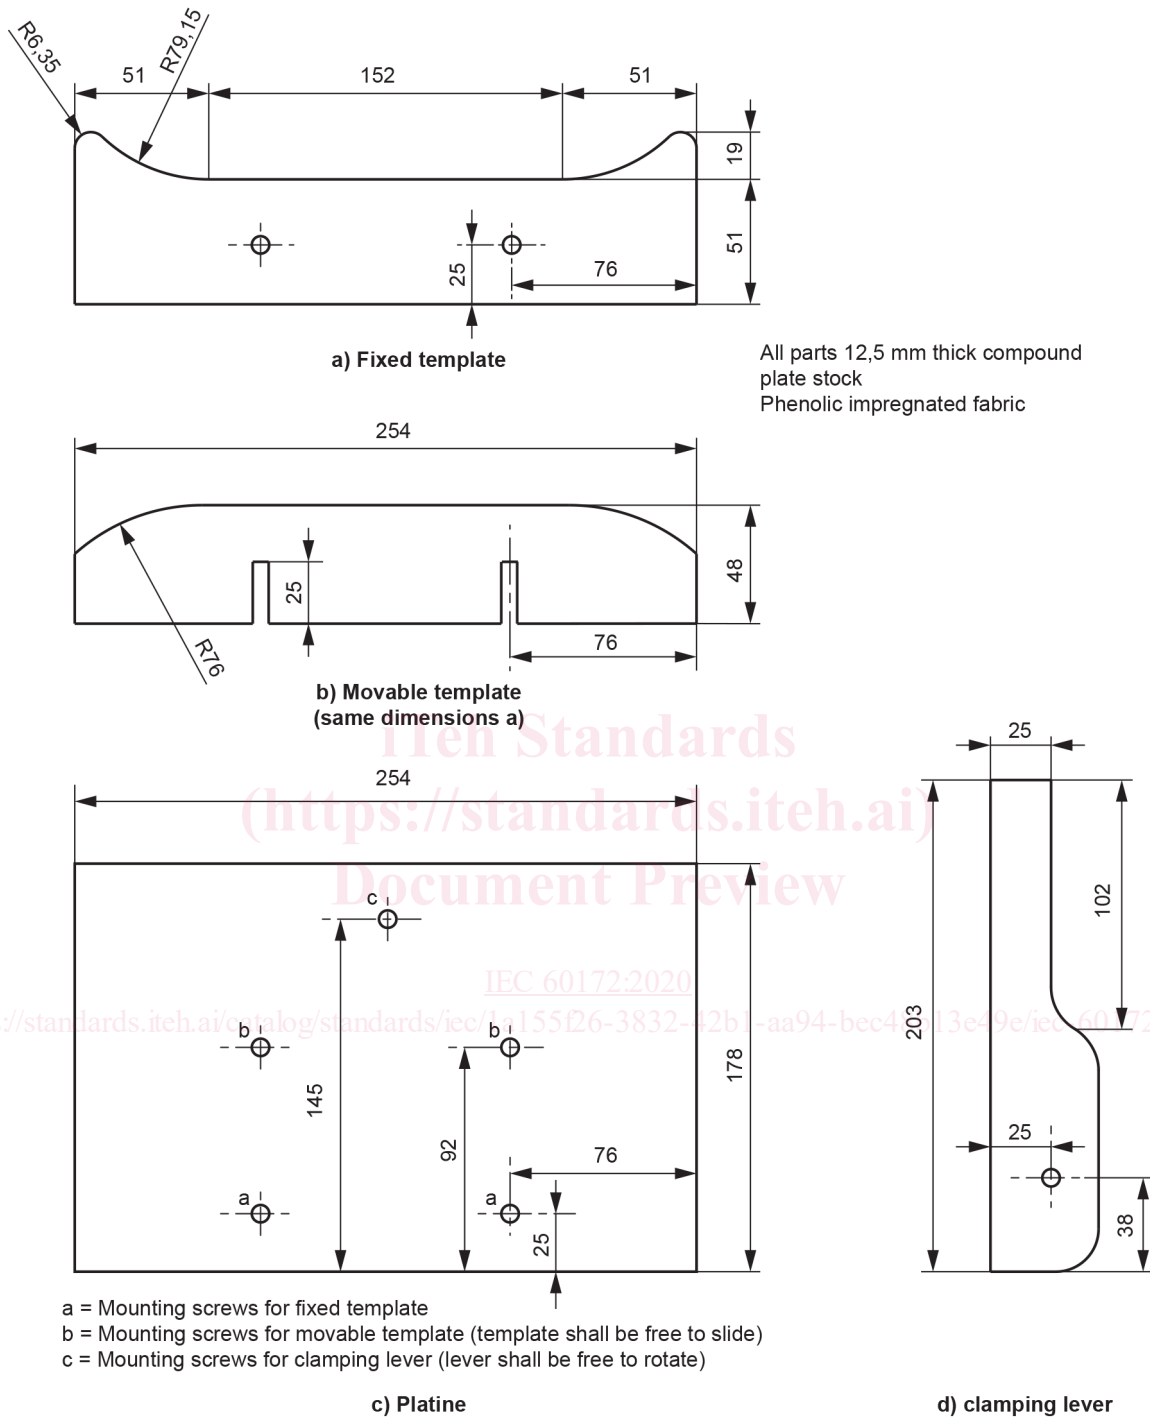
Jig for bending large magnet wire, dielectric test specimen
